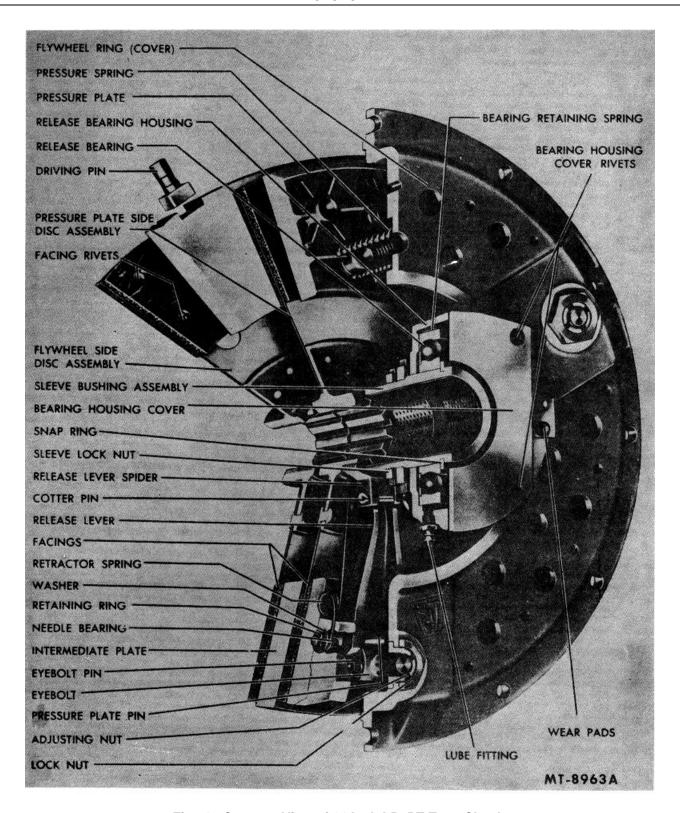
Cutaway View of 14 Inch LP, PT Type Clutch
